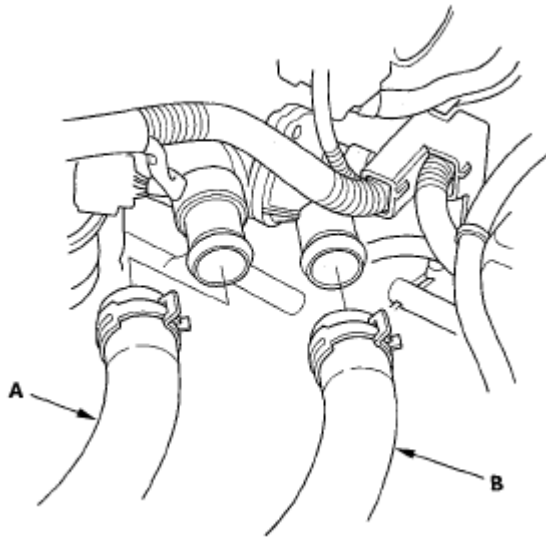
Identifying Upper Radiator Hose And Lower Radiator Hose
